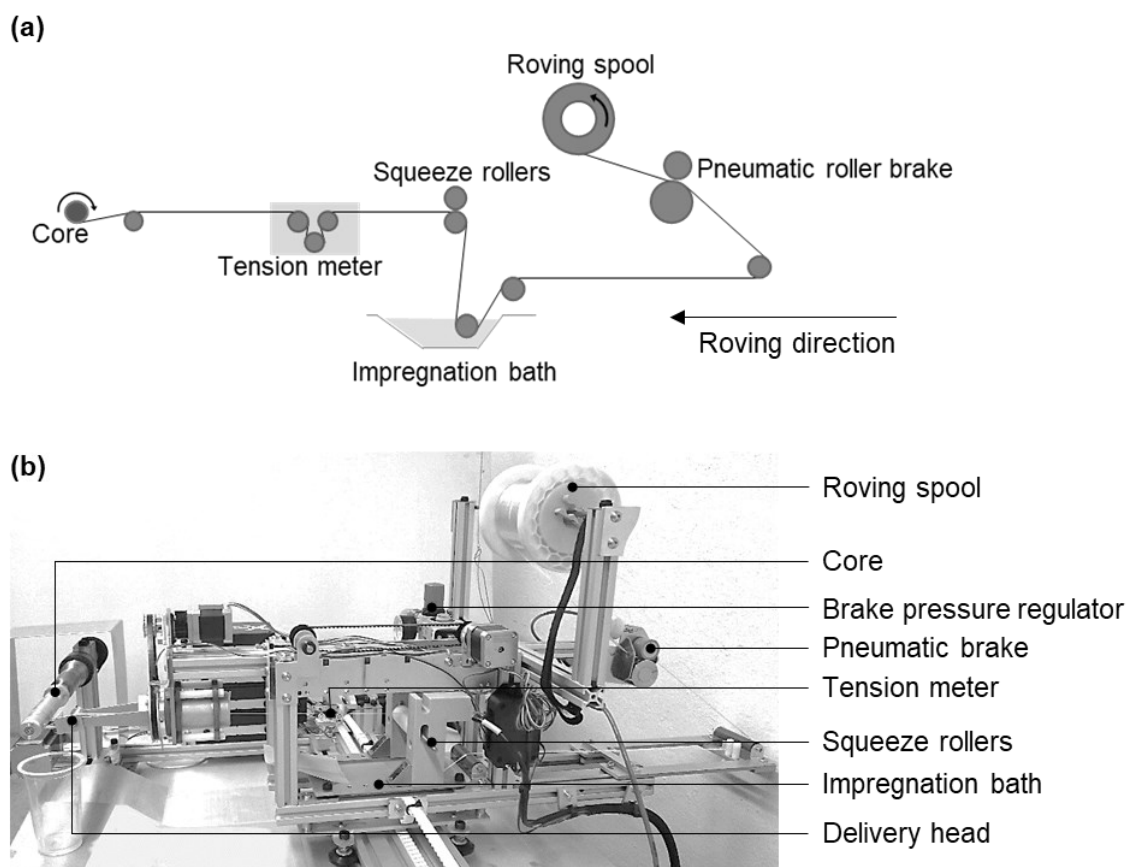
Preparation of pre-impregnated fibre wound core using a 4-axis filament winding machine: (a) schematic representation of the fibre path from the spool to the core; (b) filament winding machine and its components.
